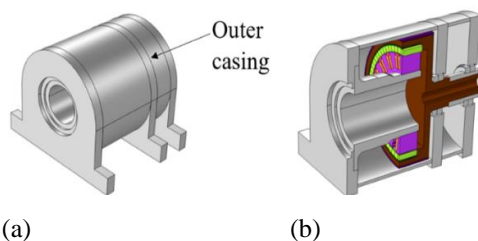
(a) 3D full-scale and (b) cross-sectional views of the motor for the cantilever rotor design
